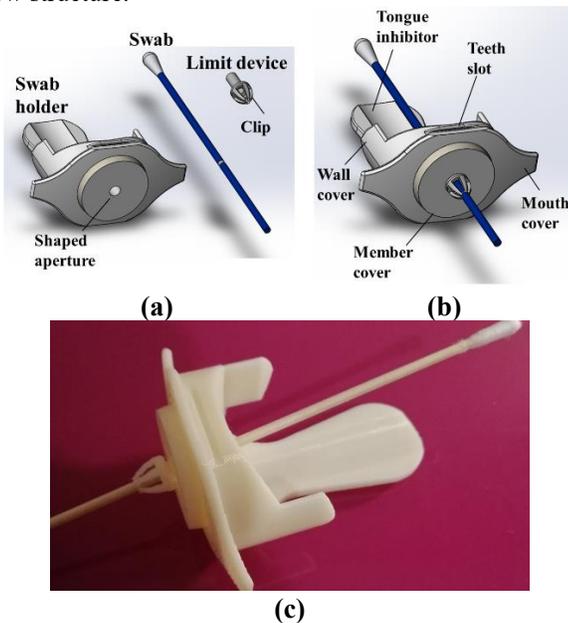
STRUCTURE OF THE SWAB ASSEMBLY: a) EXPANDED VIEW; b) ASSEMBLY VIEW; c) PROTOTYPE
